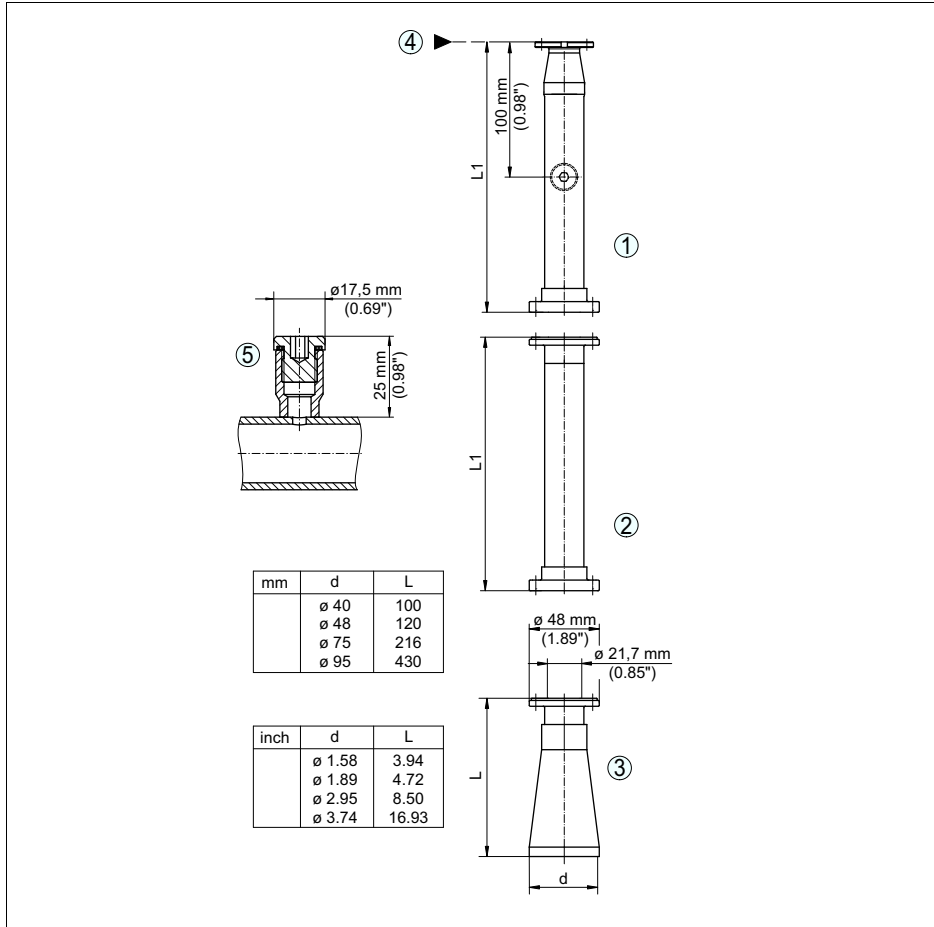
Extension multi-sectional, straight, unassembled horn antenna, dimensions depending on the order specification
